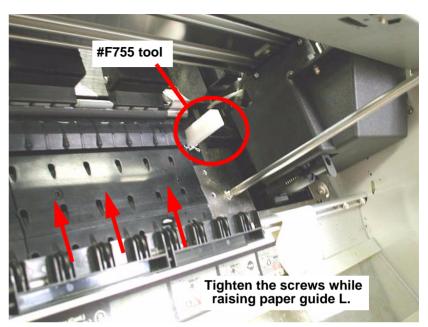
Paper Guide L Assembly Position Adjustment (2/2)
